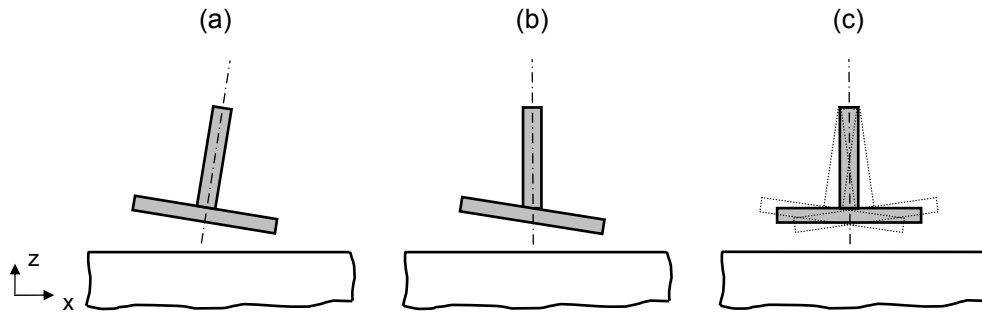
Three idealized sources for non-uniform rotor-stator air gap: (a) rotational axis misalignment, (b) rotor-to-shaft mounting misalignment, and (c) runout caused by bearing play and dynamic loads.
